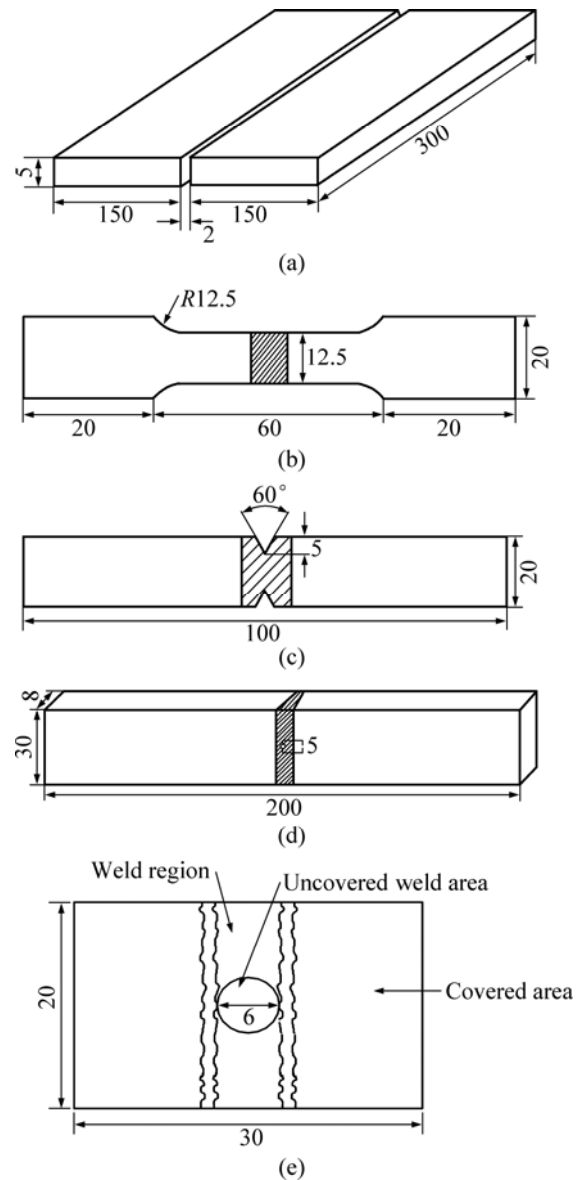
Dimensions of various test specimens (Unit: mm): (a) Square butt joint; (b) Unnotched tensile/fatigue specimen; (c) Notched tensile/fatigue specimen; (d) Centre cracked tensile (CCT) specimen; (e) Pitting corrosion specimen
